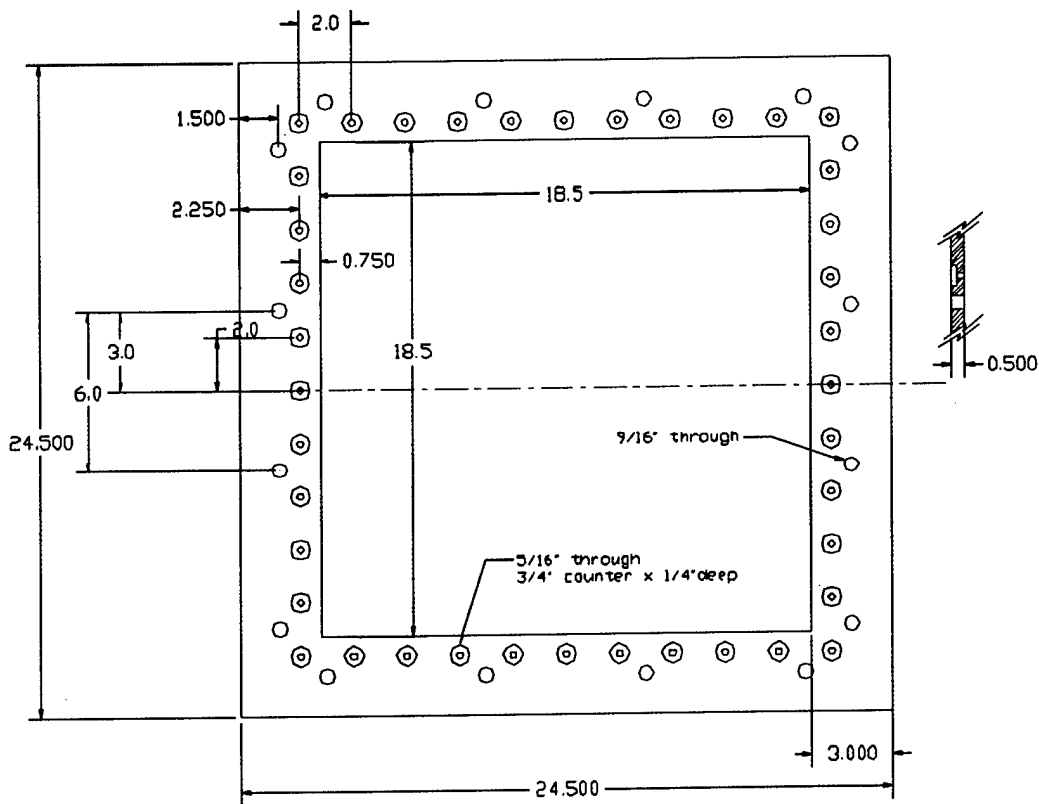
Steel Frame Schematic with Dimensions in Inches
